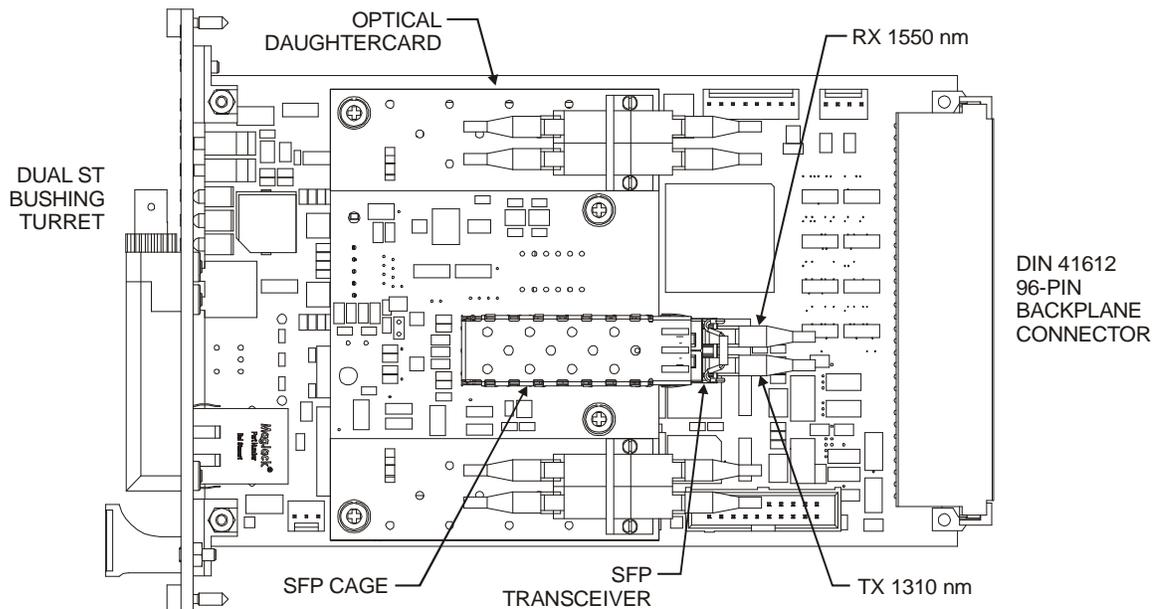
Remote FMB-X-2.5 Plan View
